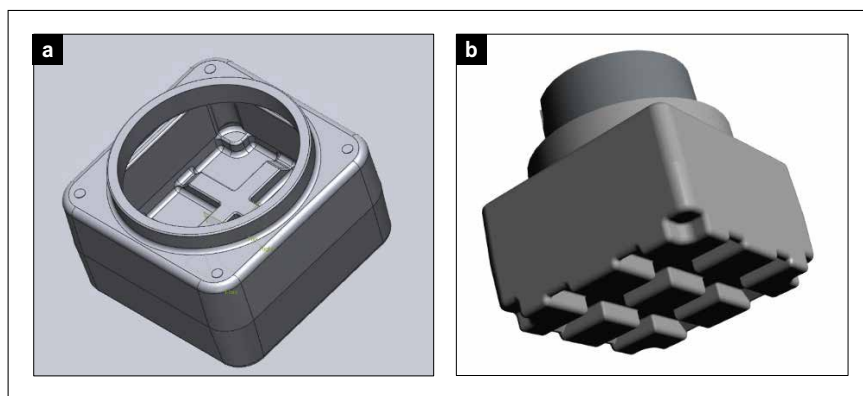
left: schematic view of an explosion-proof instrument housings; right: drawing of the developed core (courtesy Limatherm S.A. Poland).
